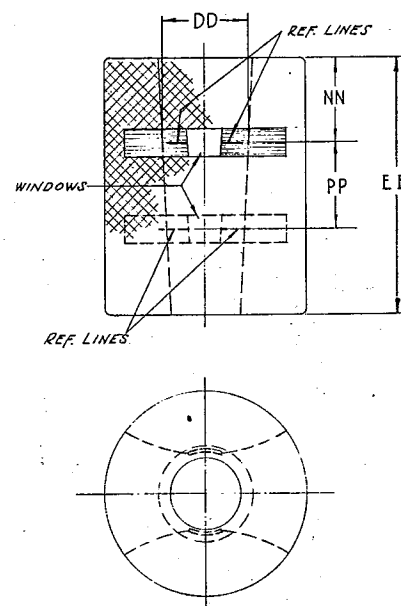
Master ring gage for single oblique-bore stopcocks.
